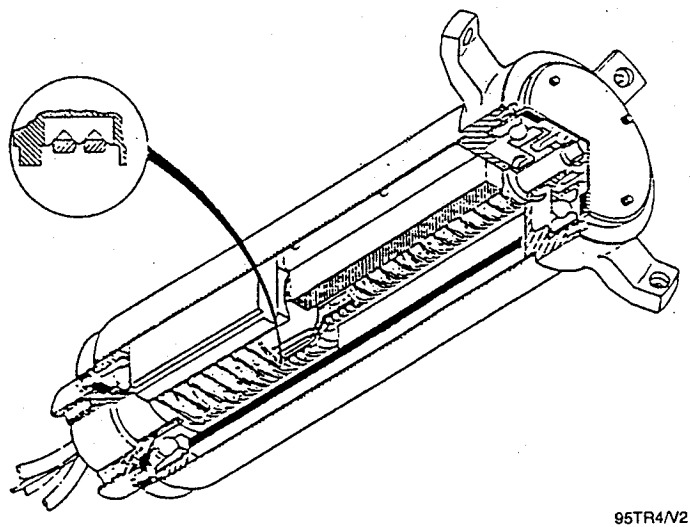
Wire-Brush Slip Ring with Double V-Groove Rings and Side-by-Side Brushes
